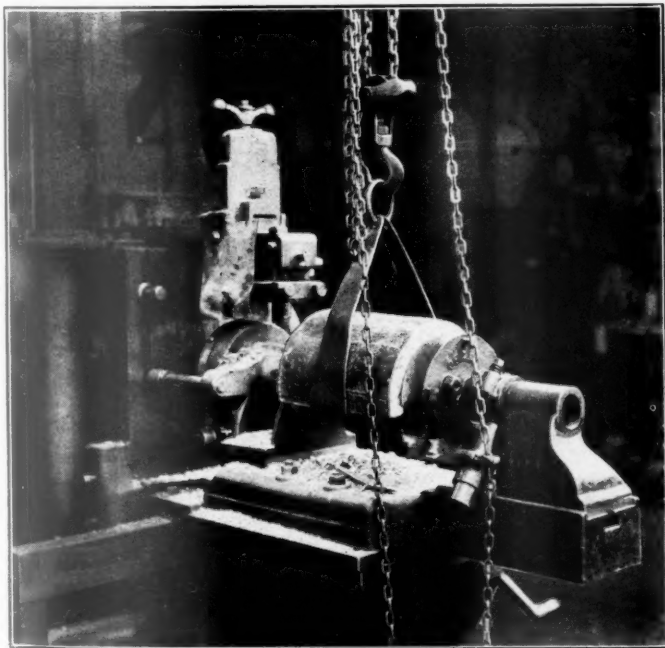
Setting Brass in Draw Cut Shaper Fixture
